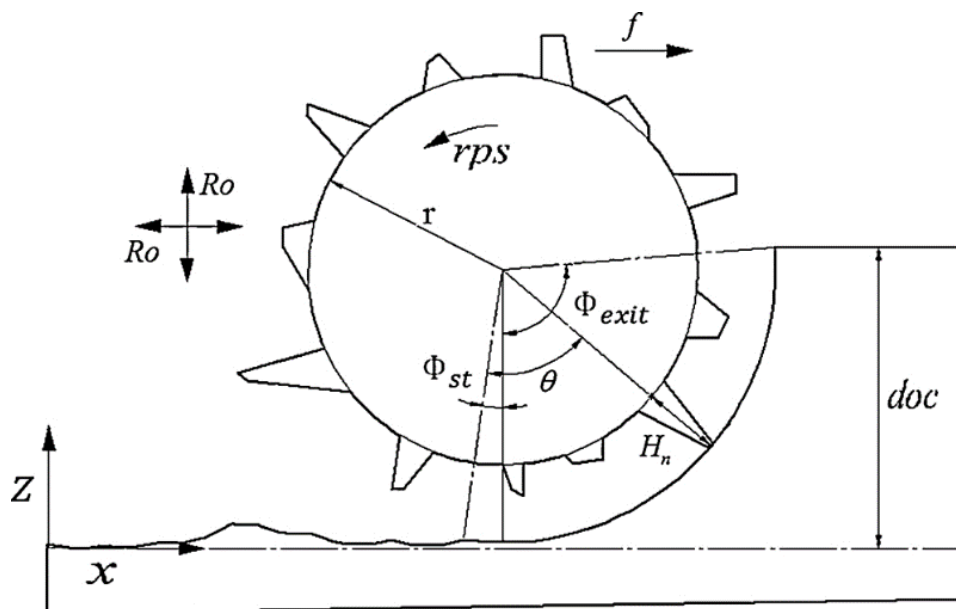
Enlarged Grit View of Surface Grinding [2]
